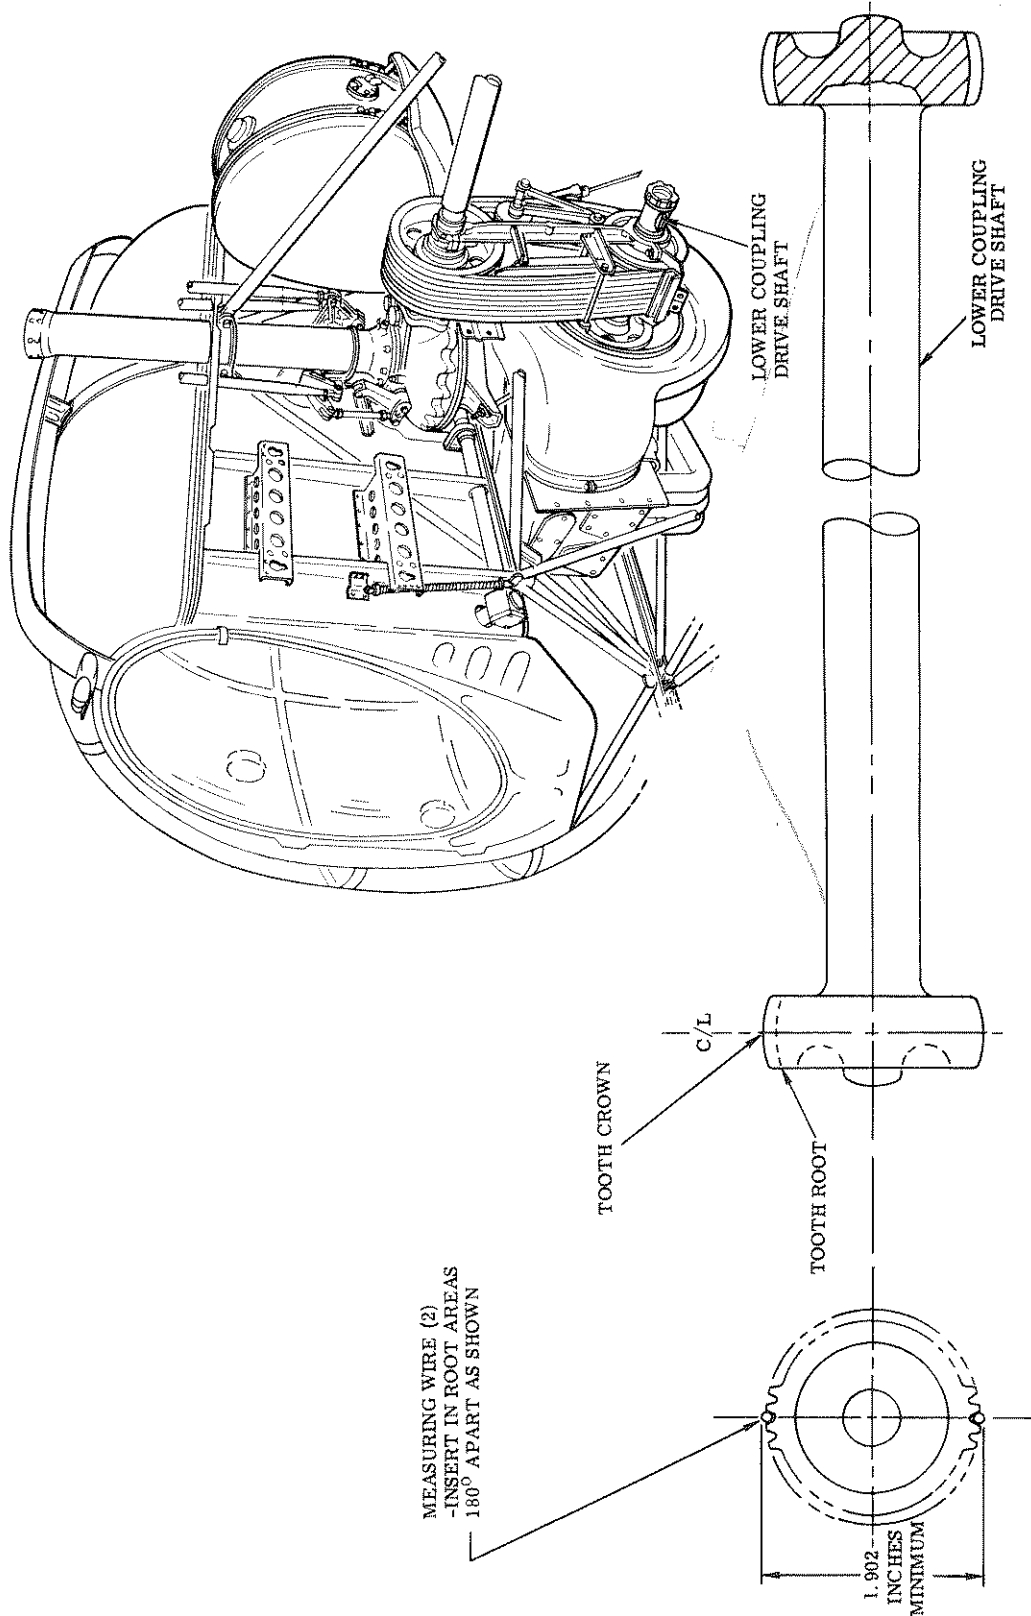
WEAR TOLERANCES - LOWER COUPLING DRIVE SHAFT, GEAR TEETH
